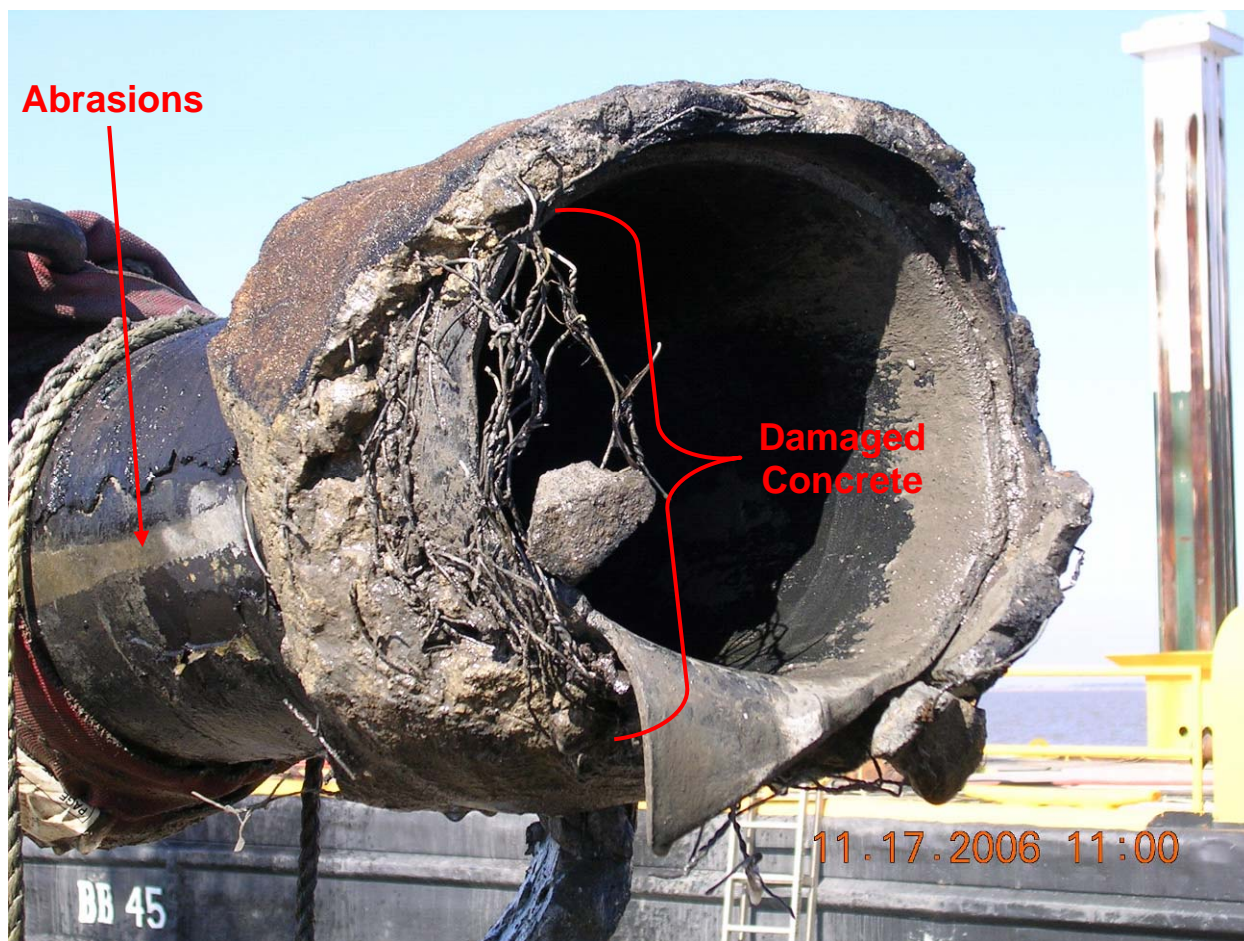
Abrasions in the field weld joint closest to the transverse fracture in the west portion of the sales gas line.
